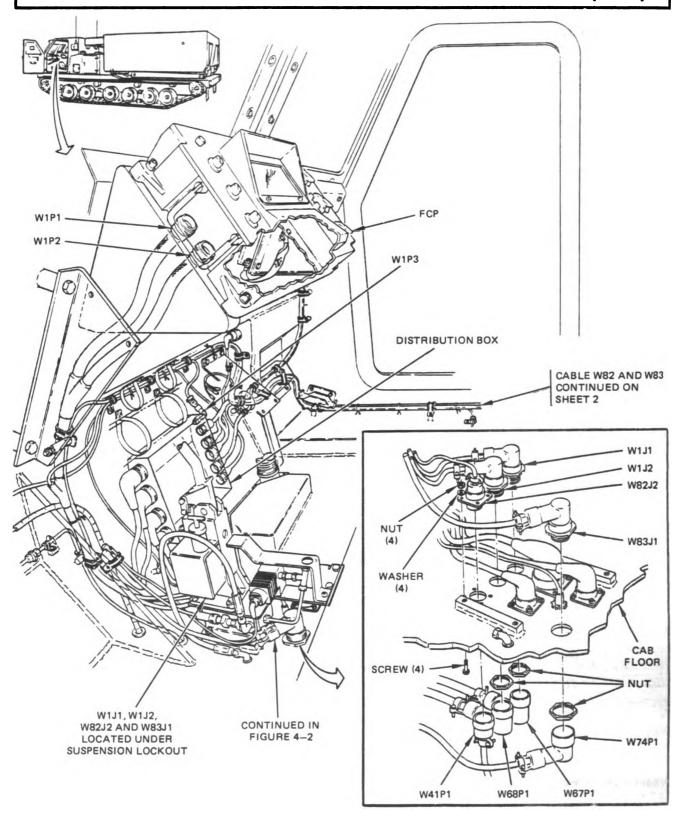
Vehicle Cab Interconnecting Cable Assemblies (Sheet 1 of 2)
